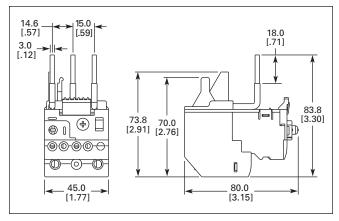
45 mm C396 (6.4 - 45A) Direct Connect to XT Frame D Contactor — Approximate Dimensions in mm [in]
